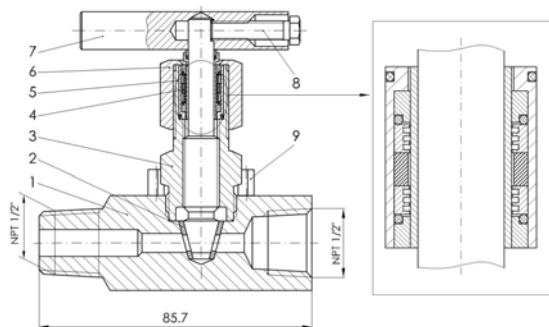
Gas valve equipped by magnetic fluid or CMF seal; 1 - Body; 2 - Valve seat;
